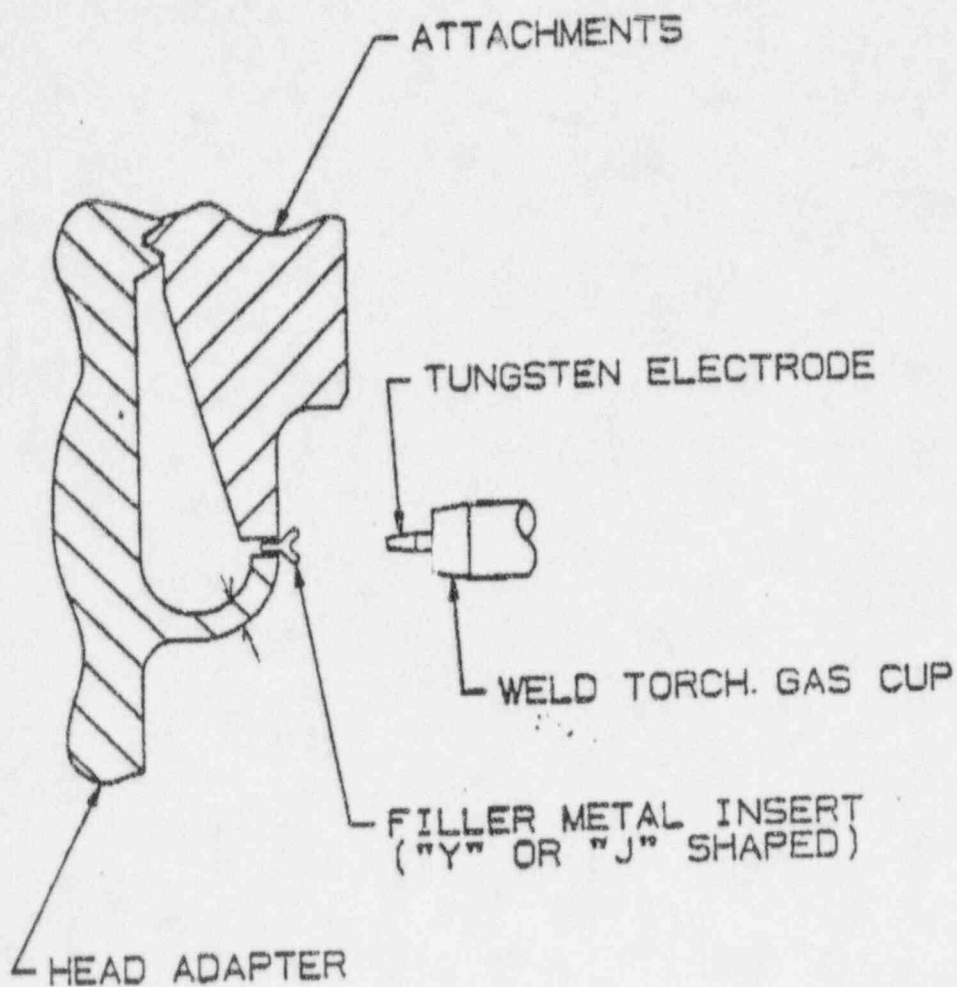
Schematic Illustration of Canopy Seal Weld Configuration
